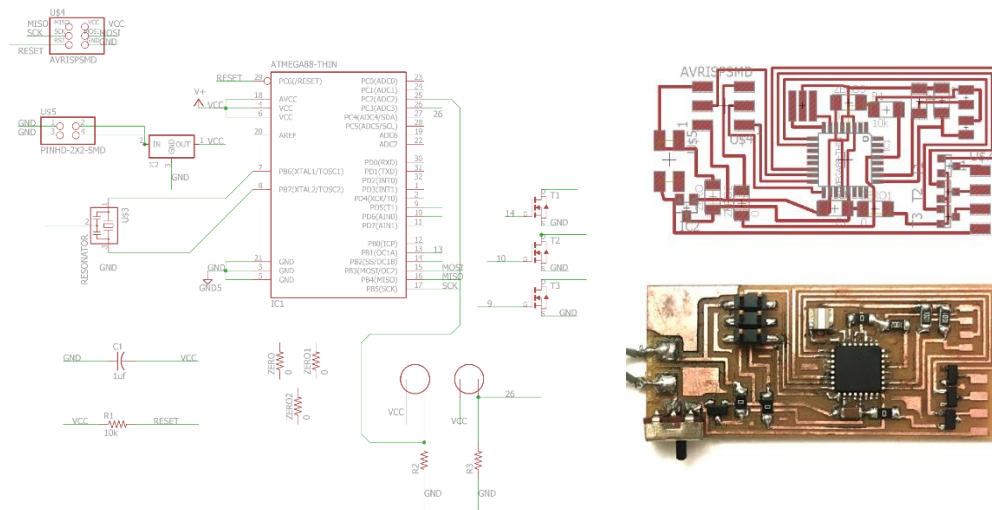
Left: Schematic drawn with Eagle Software, right: PCB Design and fabrication
